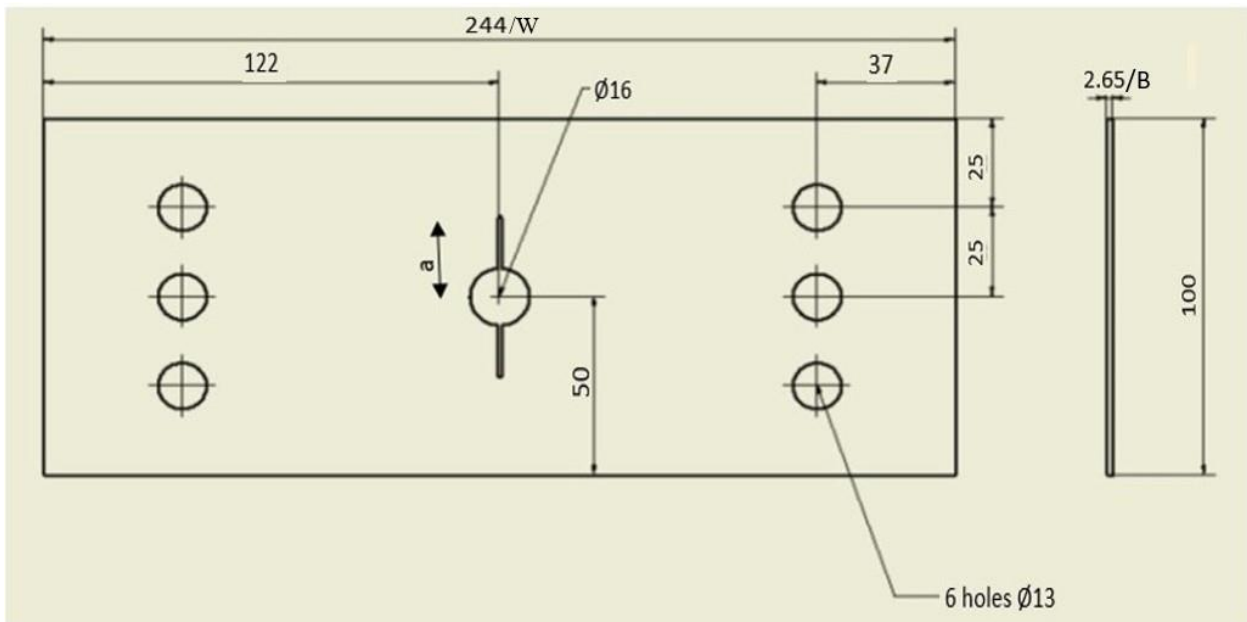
Center Cracked Tension specimen for fatigue crack growth tests (mm).
